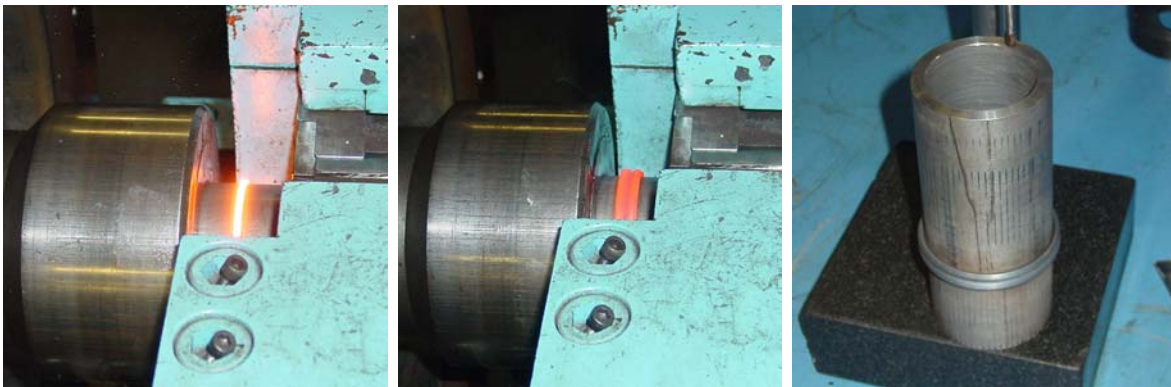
Sequence of inertia welding operations to produce robust joints in MA956 tubes.
